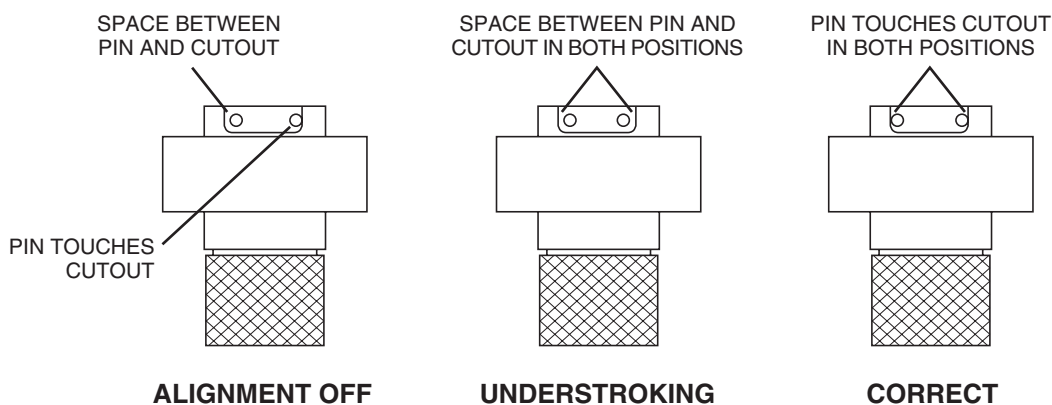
Visually checking the alignment on Valco valves (rotor pin shown in both positions)
